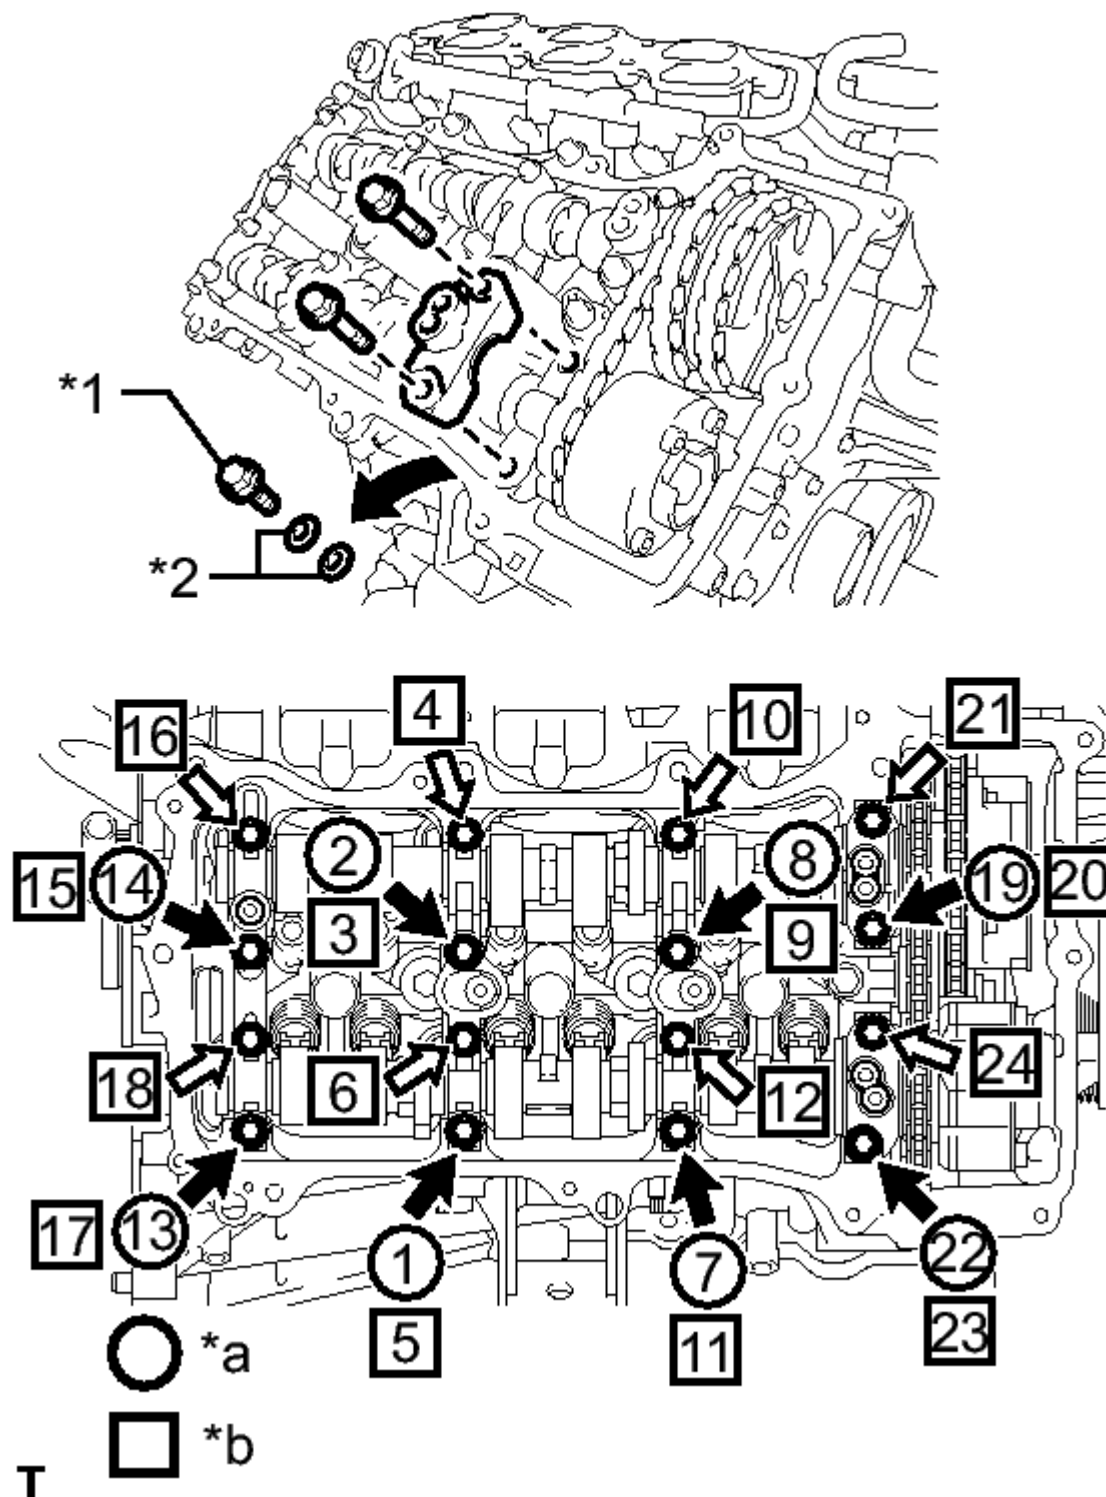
Identifying Camshaft Bearing Caps And Bolts (Bank 1)
